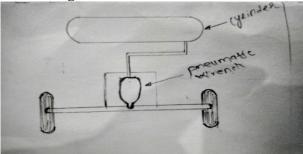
Arrangement of Pneumatic Wrench 2.1 MAIN PARTS
